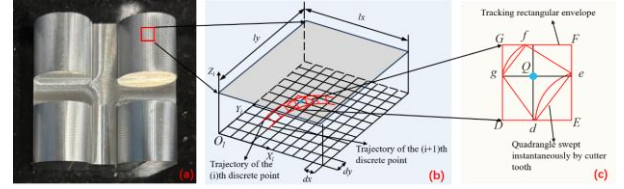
(a) Milling workpiece; (b) Discrete grid map of the milled workpiece; (c) tracking rectangular envelope and instantaneous swept quadrilateral diagram.
